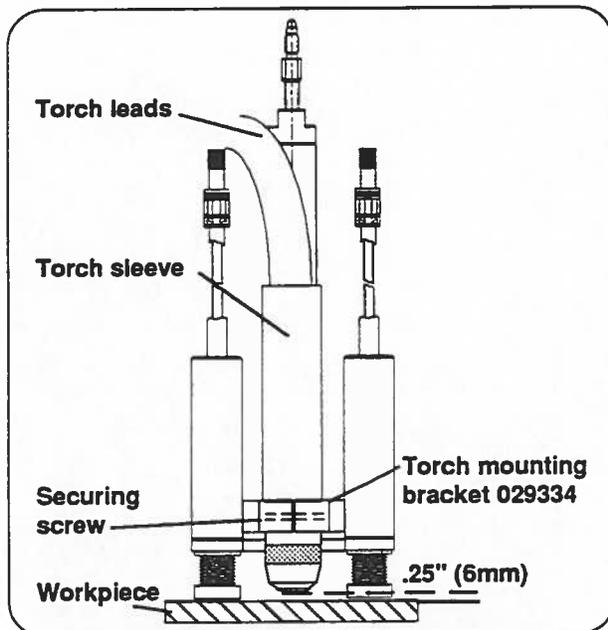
Mounting the Machine Torch (shown with IHS probes)
